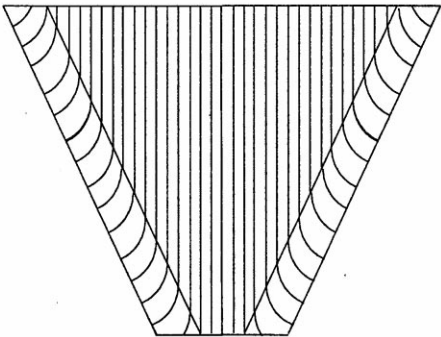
Geometry and grain structure of a real-life weld.
